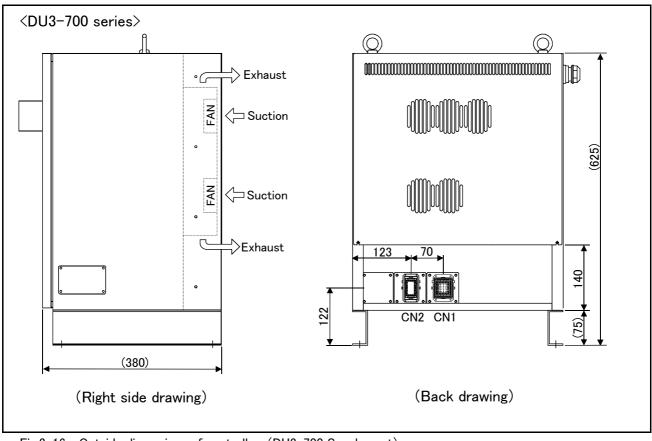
Outside dimensions of controller (DU3-700 Supplement)
